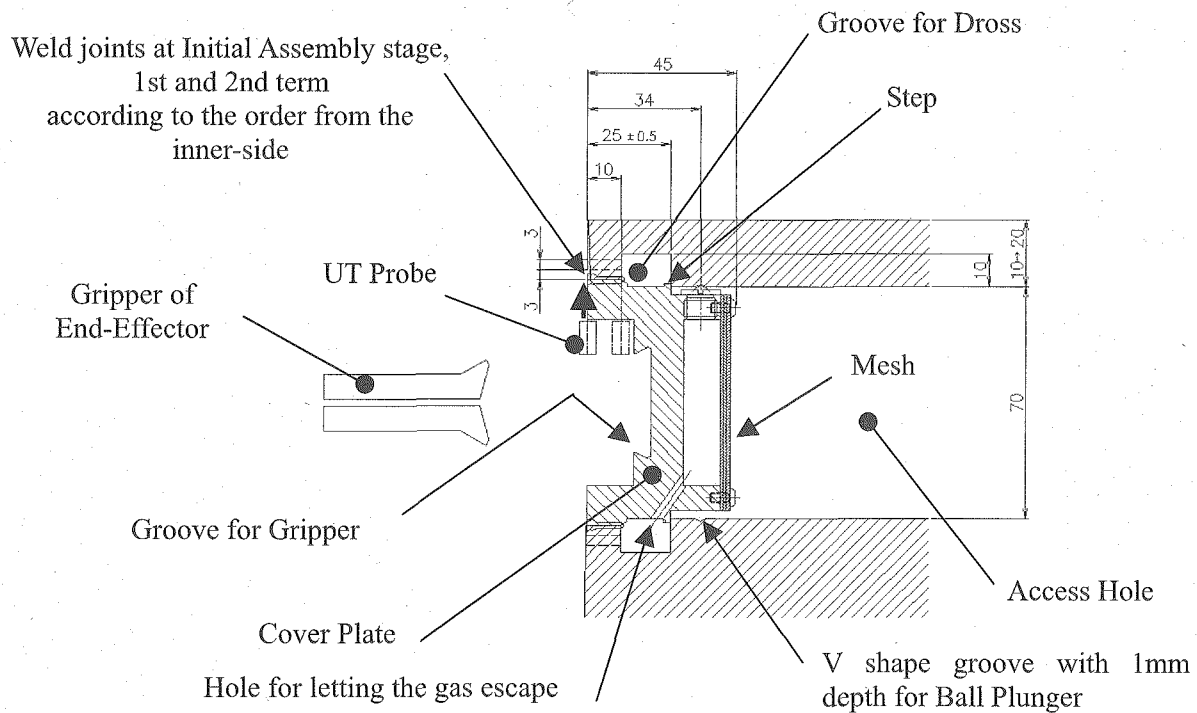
Configuration of Back Cover Plate in consideration of welding by remote handling
